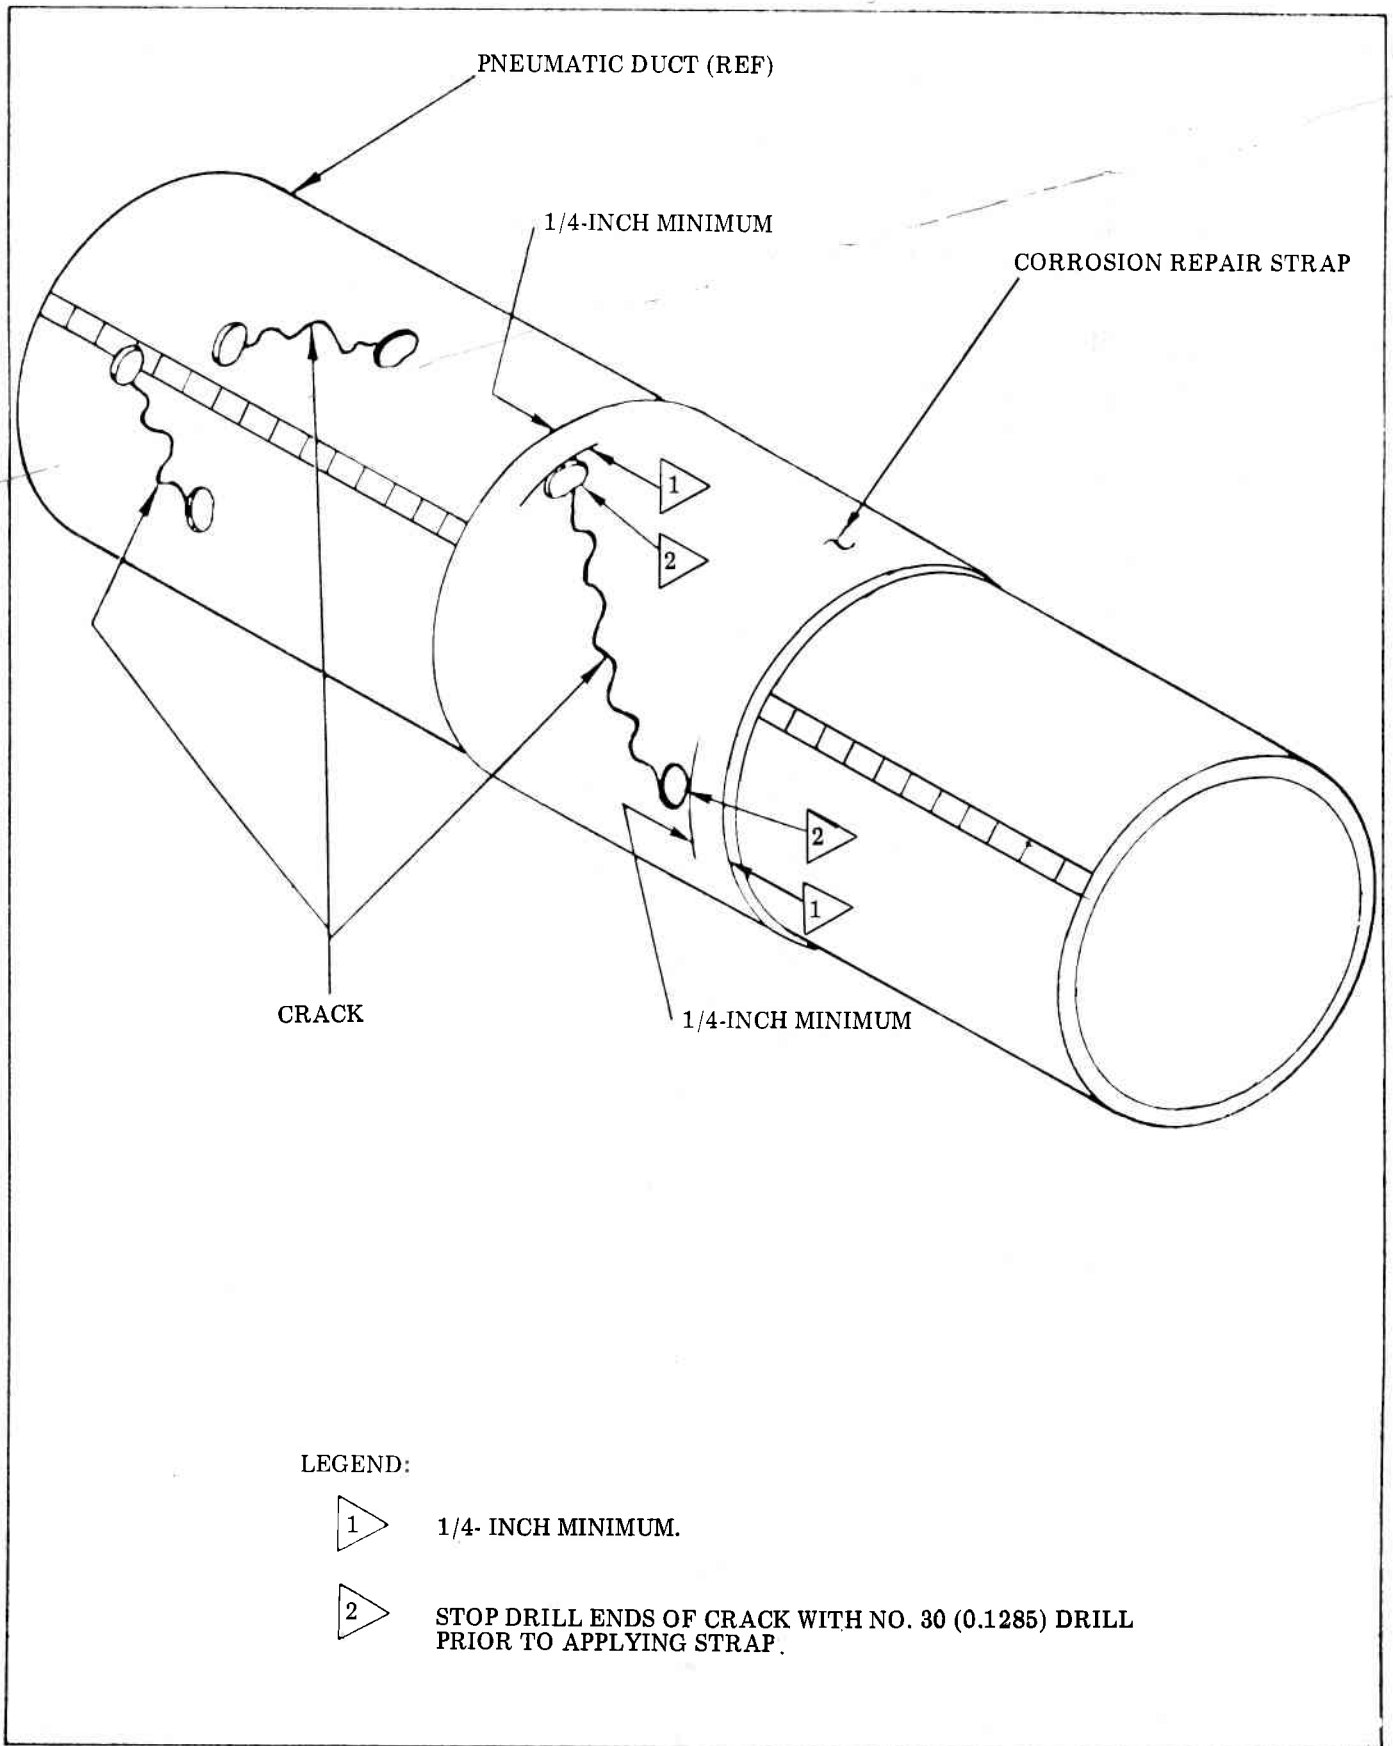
A. Strap Installation – Crack Repair – Bleed Air Duct
